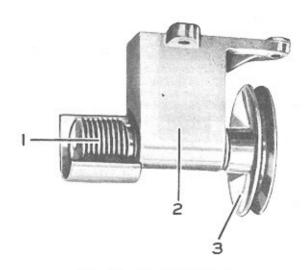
No. PH-8343-A Worm and Bearing Assembly
